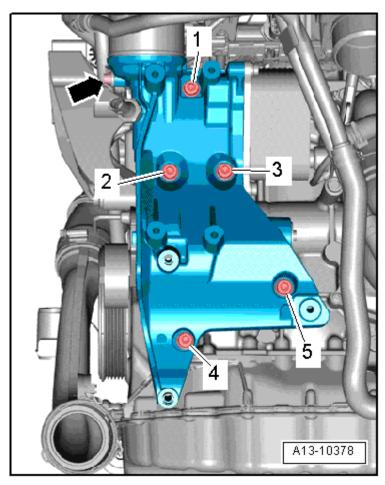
Accessory Assembly Bracket Tightening Sequence Courtesy of AUDI OF AMERICA, LLC
